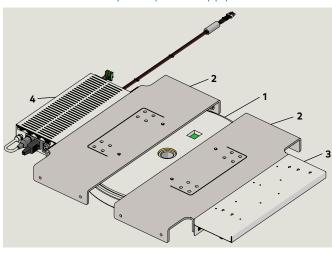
RS6048-002 Motion Assist drive bracket assembly
